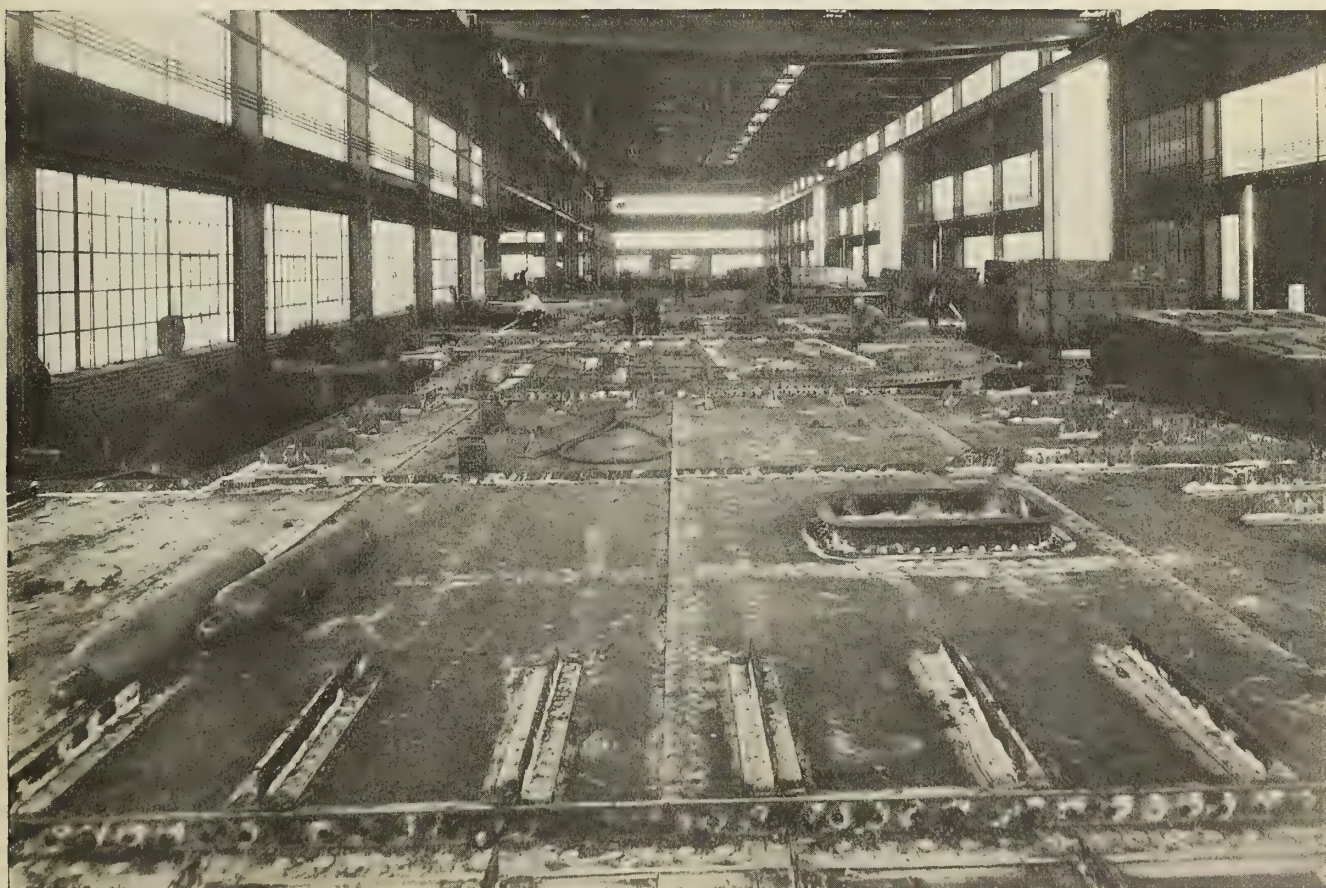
General View of Assembling Shop, Showing Bulkheads Riveted Up Ready for Installation on the Ships
